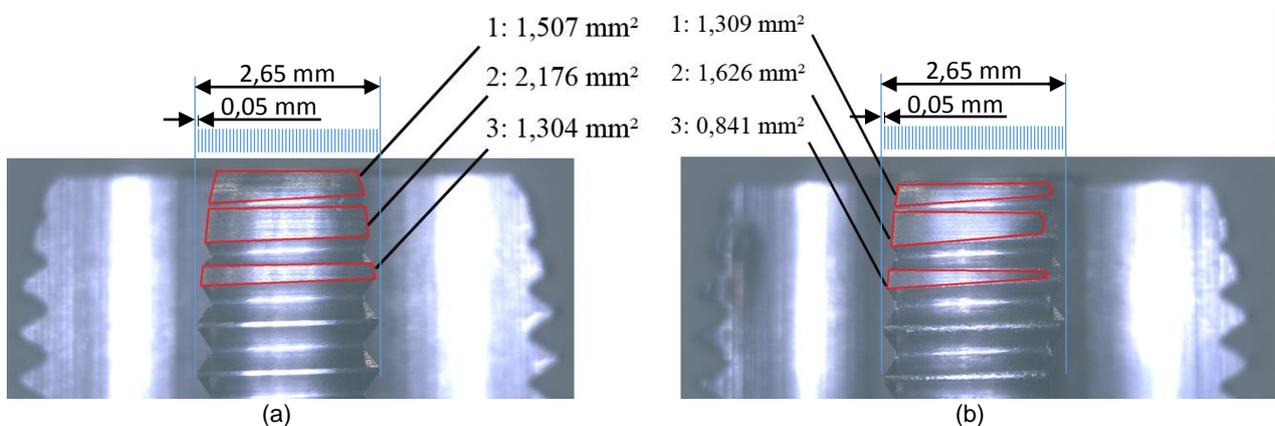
Examples of how the wear acts on the tool. (a) New HSS-PM without coating tap (b) HSS-PM without coating tap after 2100 parts.
